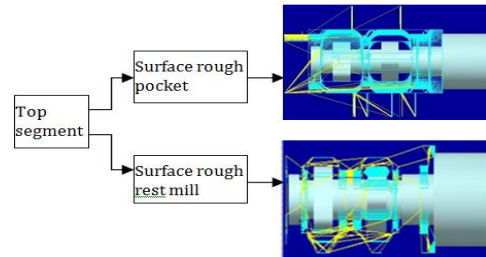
Tool paths for surface rough pocket and surface rough rest mill
